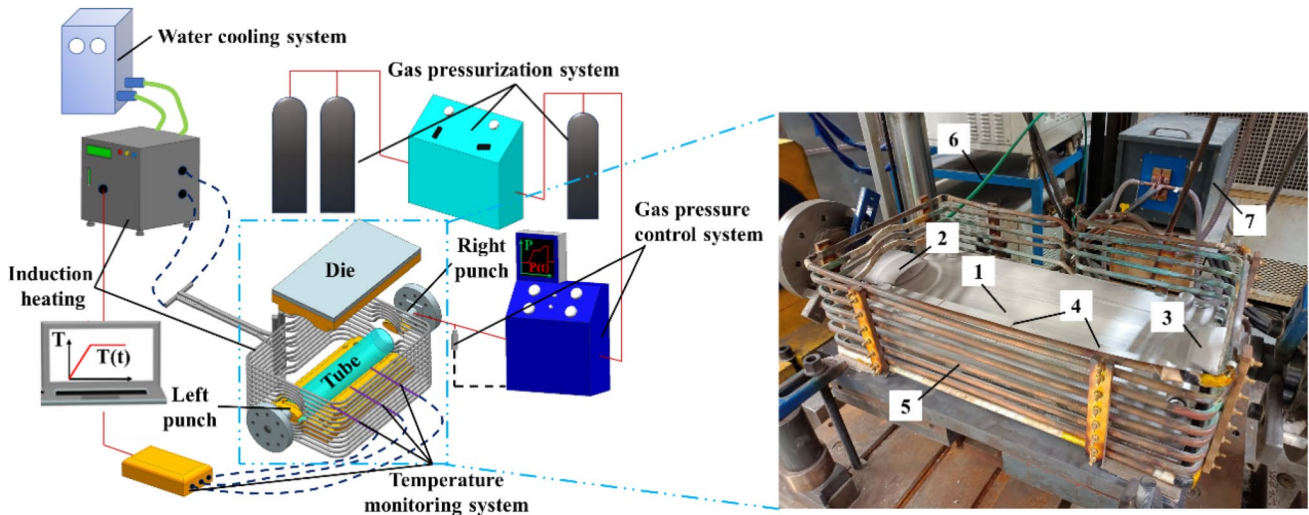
Apparatuses for HGPF of TC2 alloy, where 1 is forming die, 2 is left punch, 3 is right punch, 4 is thermocouple, 5 is the induction coil, 6 is gas inlet, and 7 is heating equipment
